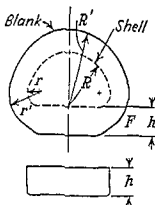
Layout of a blank for an irregular shaped shell.¹
